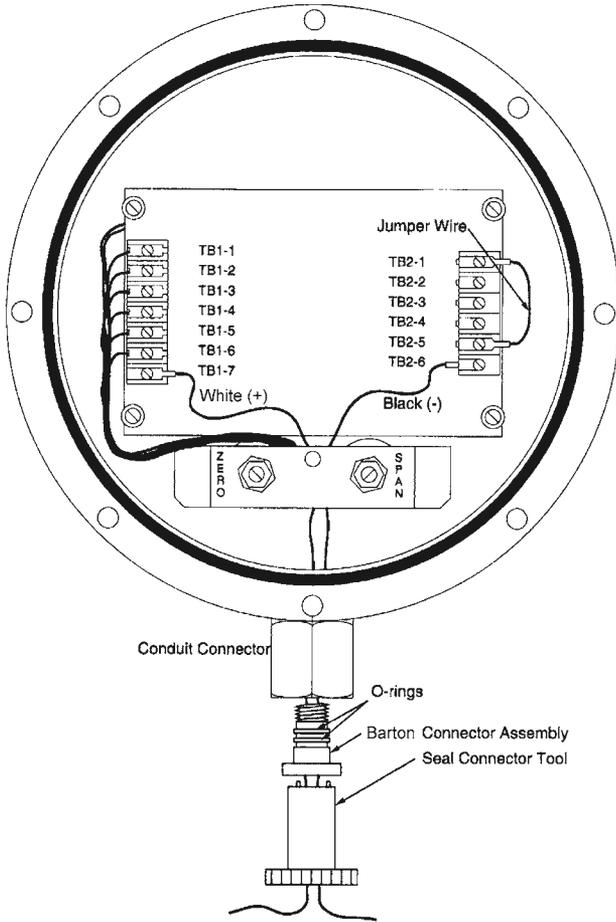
Wiring for connector assembly (leadwire) replacement, shown with Barton style connector assembly
